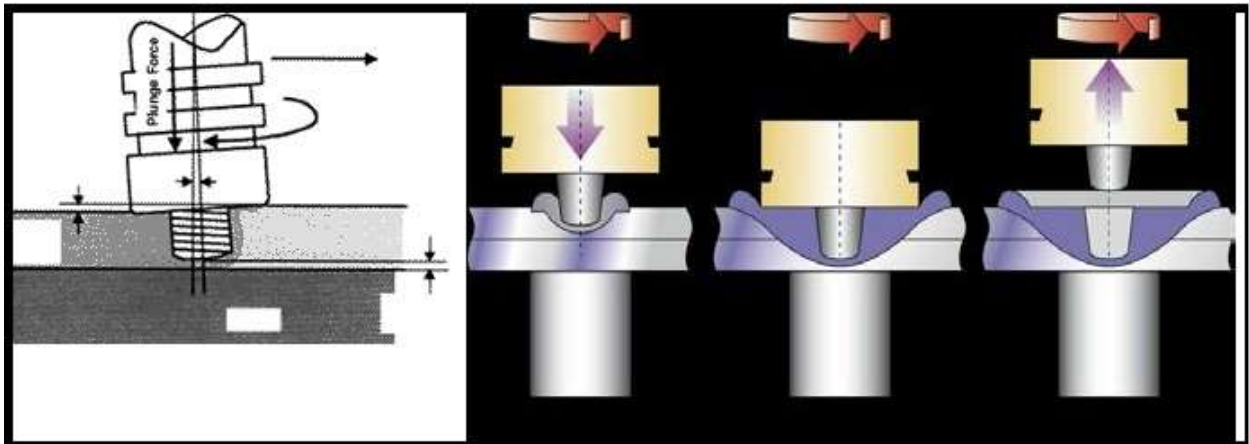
Schematic of Tool Tilt and Tool Plunge [19]
